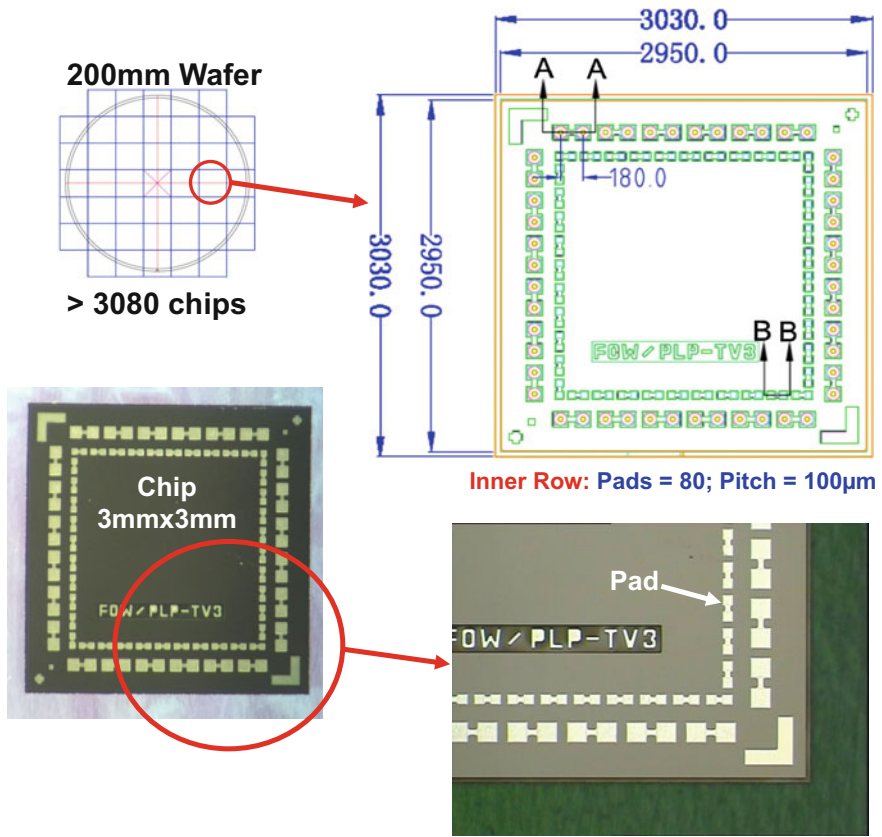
Layout and images of the 3 mm \times 3 mm test chip
